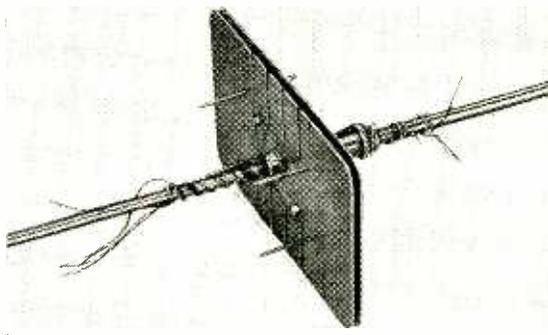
The winding former is shown here assembled and with four pins inserted ready for winding. The eight lengths of cotton for tying up the coil are also in place with the ends wrapped round the spindle and held to it by a turn or two of wire.
